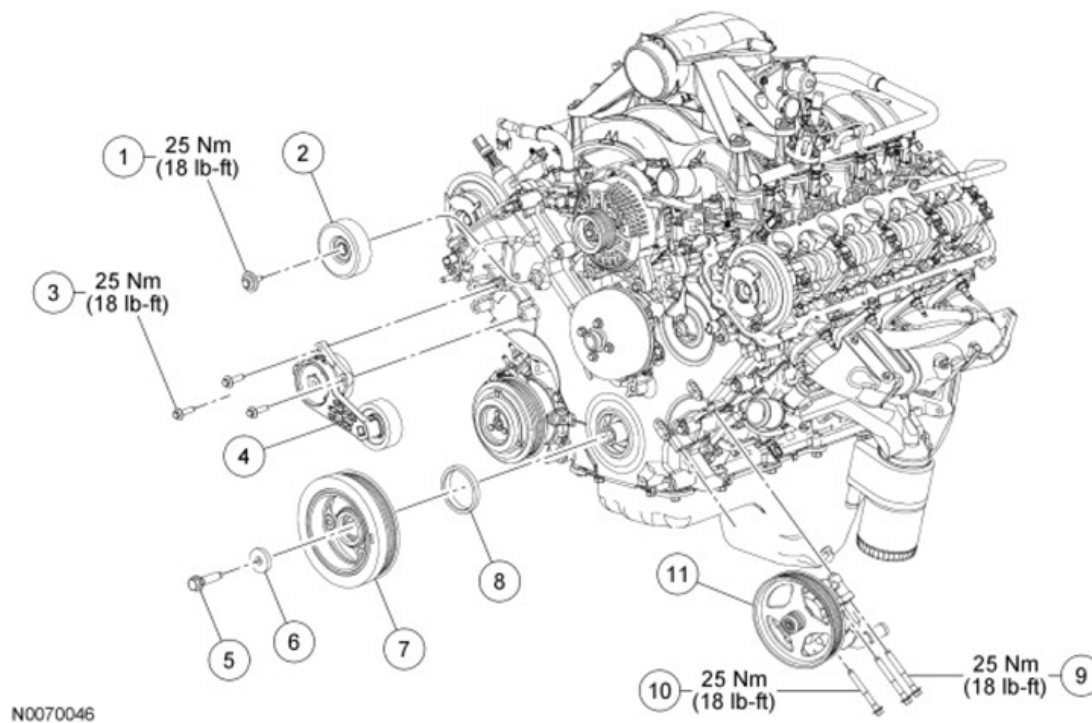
Identifying Accessory Drive Belt Idler Pulley, Accessory Drive Belt Tensioner, Crankshaft Pulley With Torque Specifications
